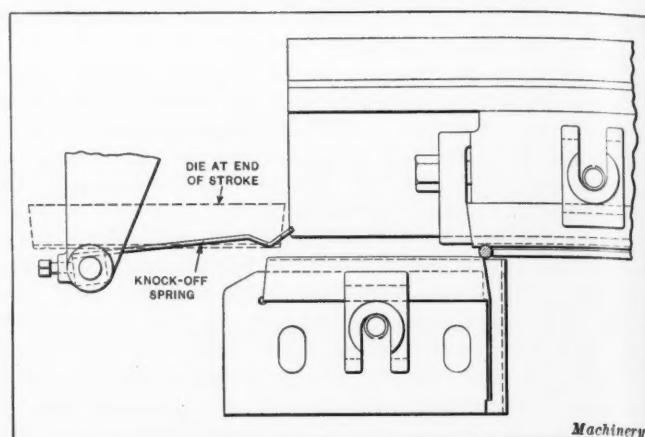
Plan View showing Relation between Thread-rolling Dies and Knock-off Spring which ejects Threaded Blank at End of Stroke
